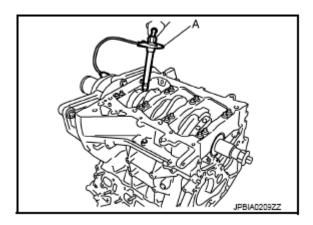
Checking Connecting Rod Bolts Tightening Angle Courtesy of NISSAN NORTH AMERICA, INC.
